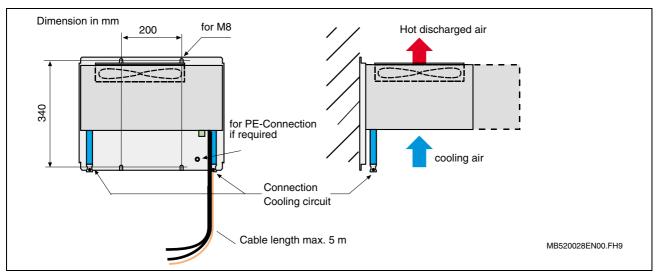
Dimension sheet for wall mounting, size class H
